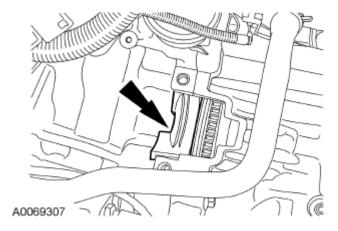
Locating Torque Converter Nuts Courtesy of FORD MOTOR CO.
